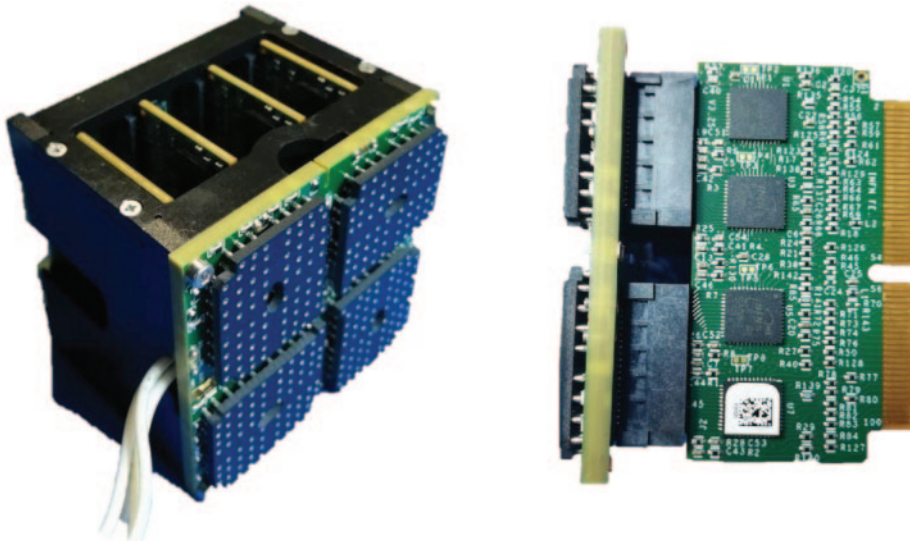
Left: an assembled EC-R. Right: a view of an EC-R from the side without case and backboard, the CLARO chips are soldered on the front end boards.
